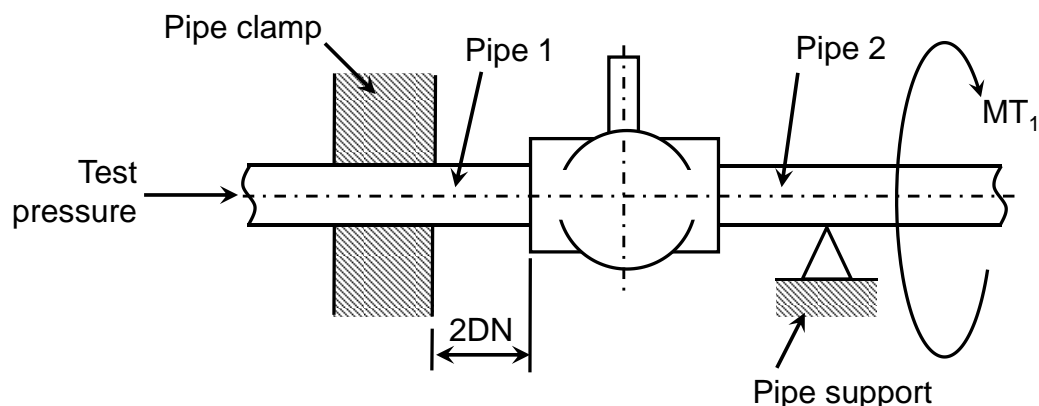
Test apparatus for testing of resistance to torsional moment on the valve body
